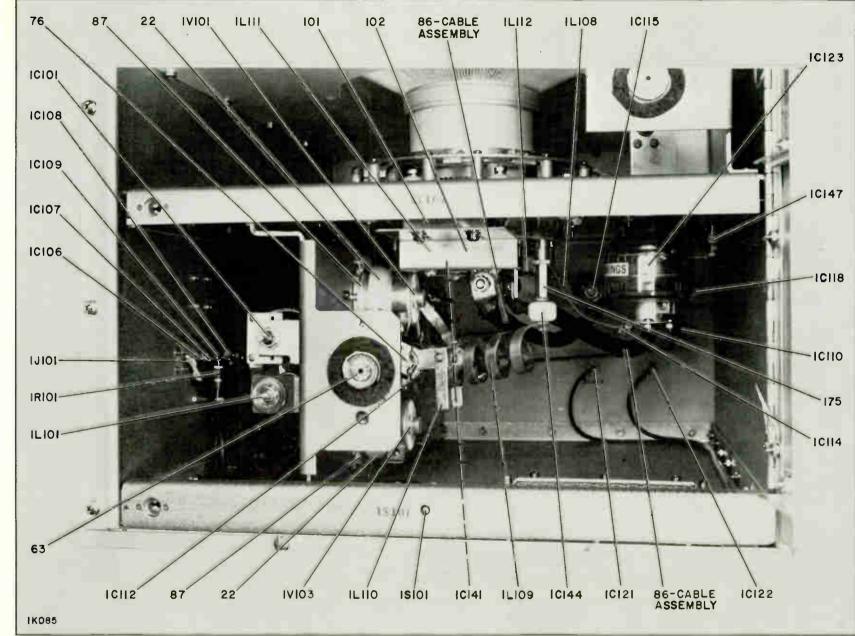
Driver Shelf and 1XV102 Shelf, Front View
